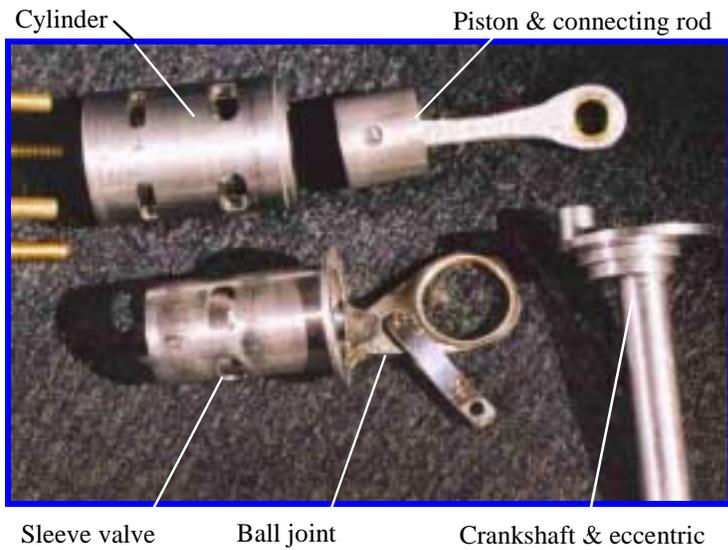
Mechanically operated Sleeve valve engine components having 0.05 cu. in. displacement .
